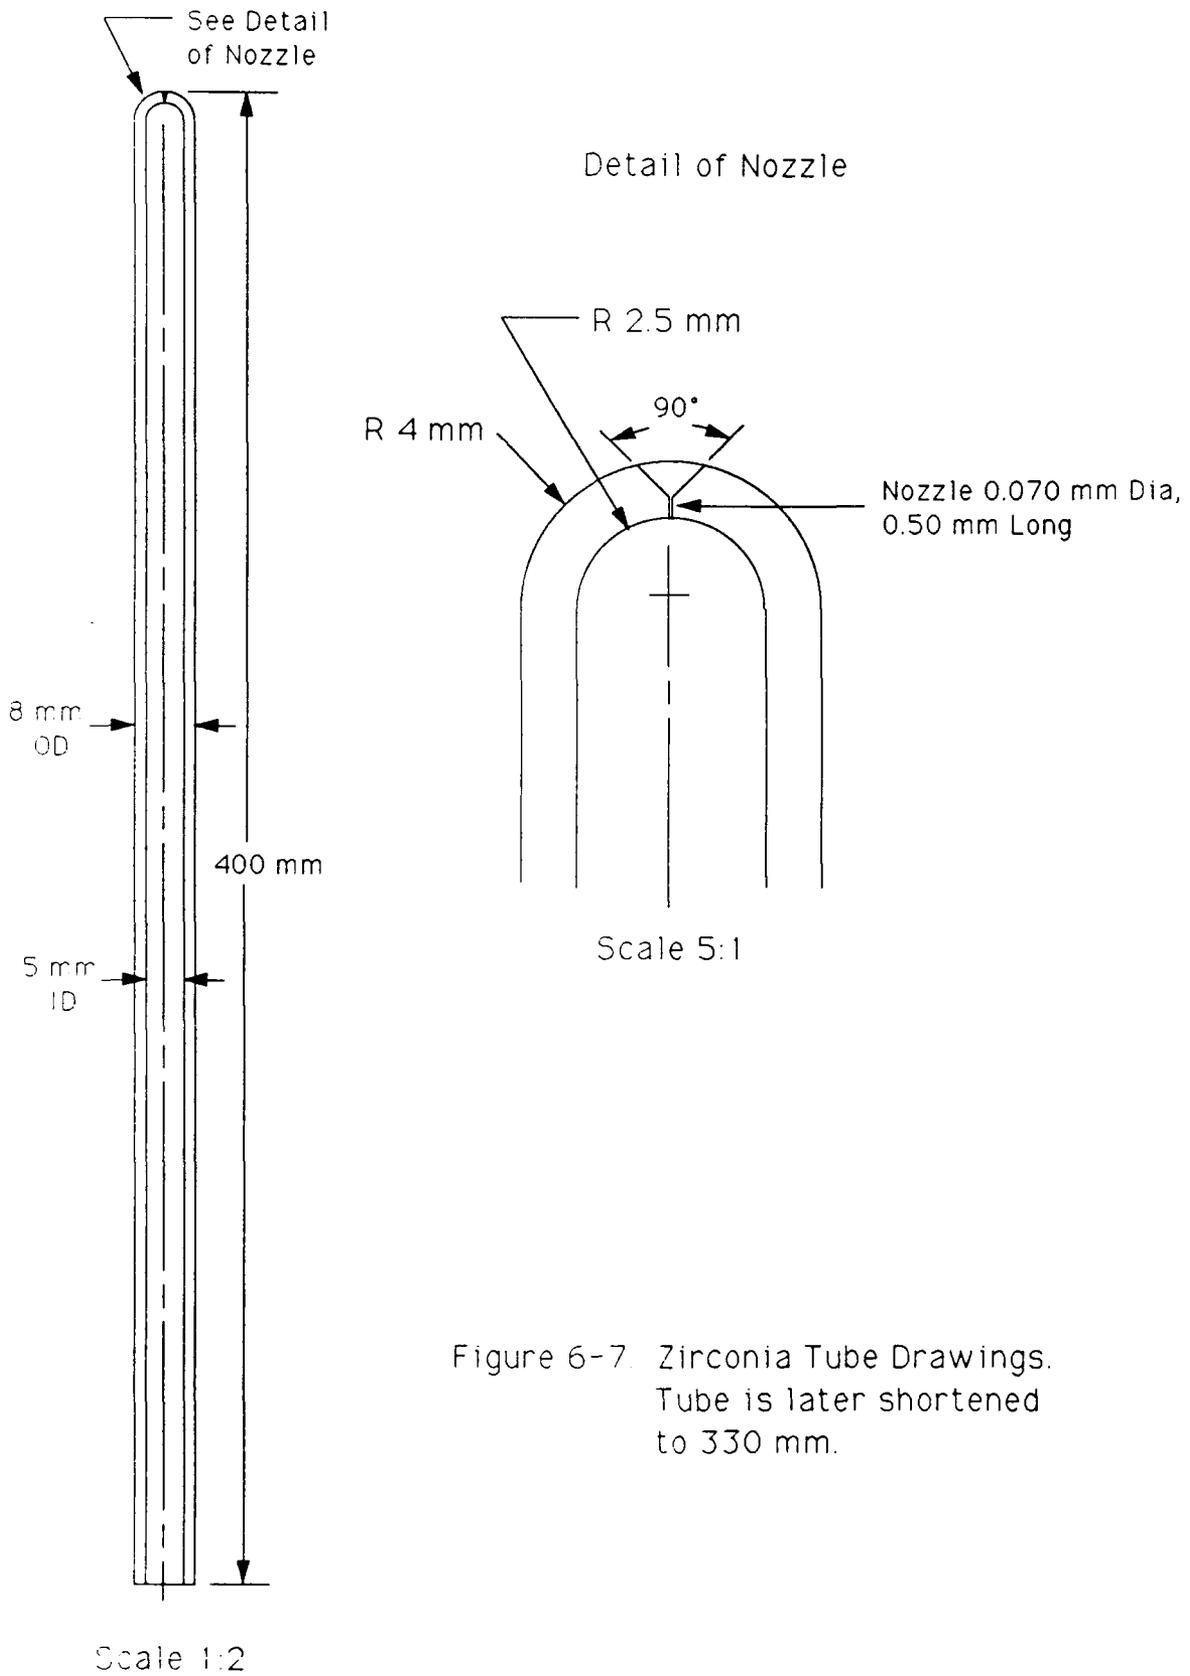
Zirconia Tube Drawings. Tube is later shortened to 330 mm.
